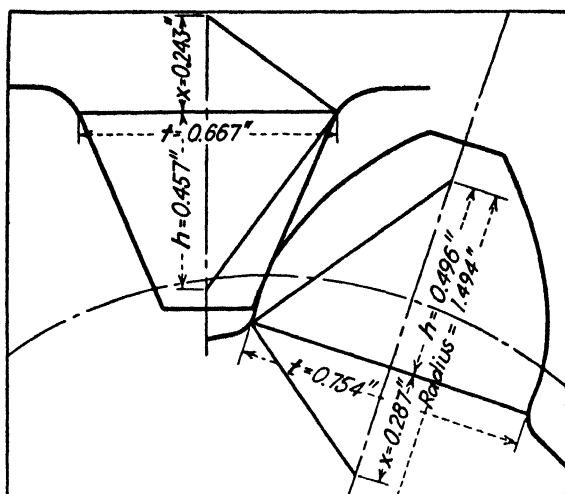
TOOTH LAYOUT FOR SPIRAL BEVEL TRUCK GEARS CALCULATED.
